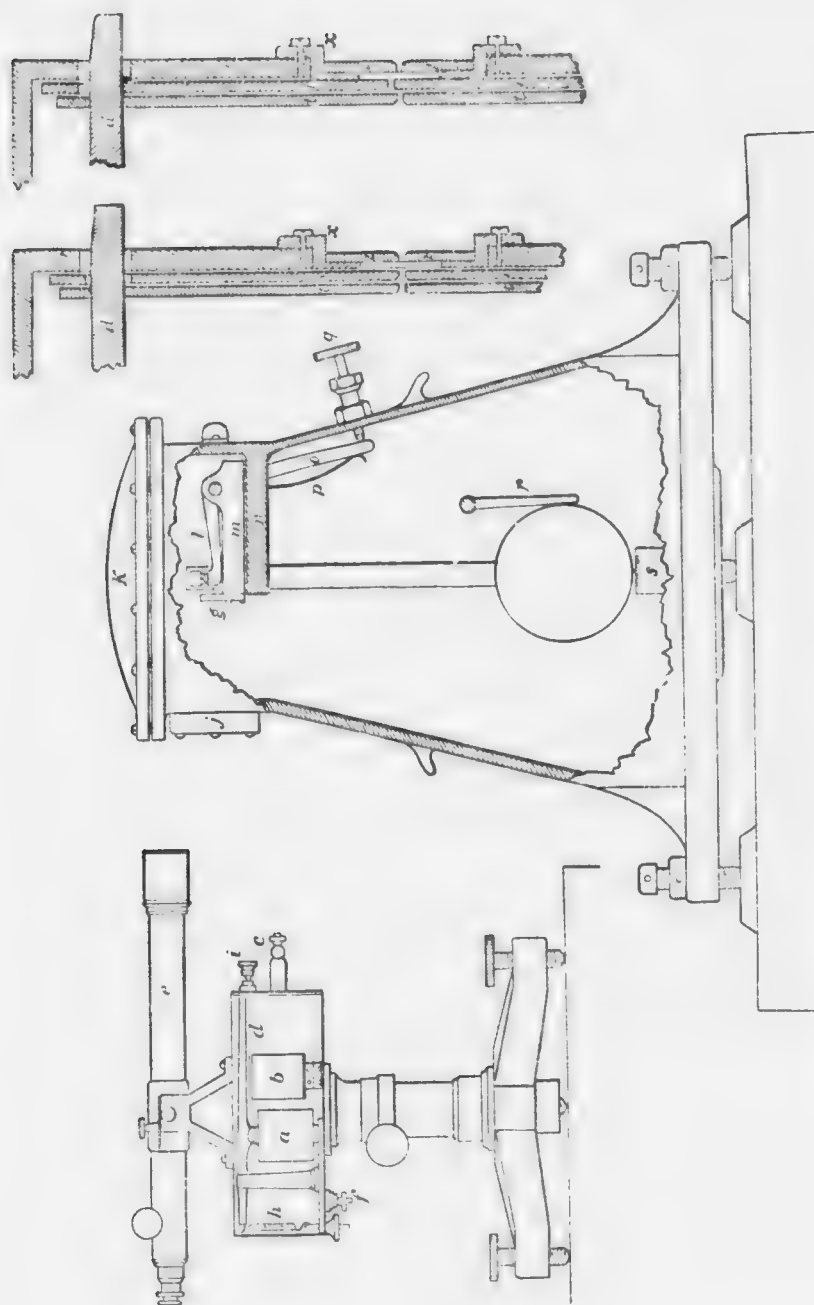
SIDE ELEVATION OF RECEIVER AND FLASH APPARATUS AND SECTION THROUGH SHUTTLES.
